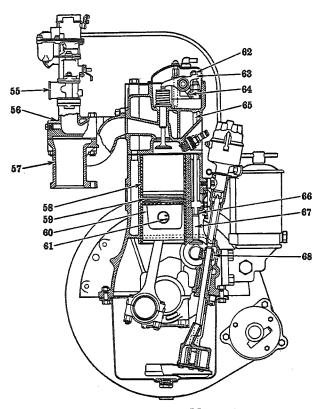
, FBB-361, FBB-401, FBB-450A Engine
